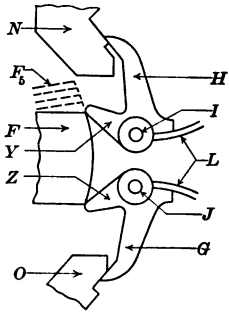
SHIELD PLATE AND PAWLS, DETAIL ENLARGEMENT FROM FIG. 286
